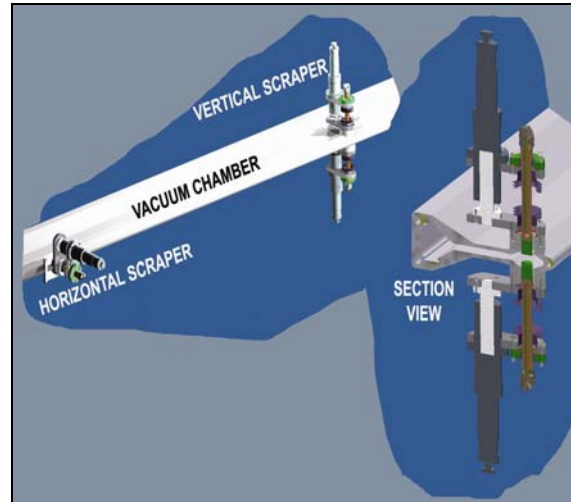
(top right) Sectional view of APS scraper assembly, blades partially opened.
